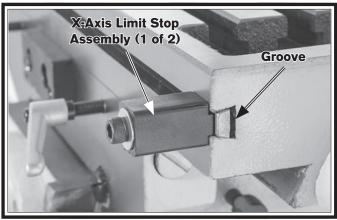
Accessory limit stop assembly mounted in table groove (1 of 2 shown).
